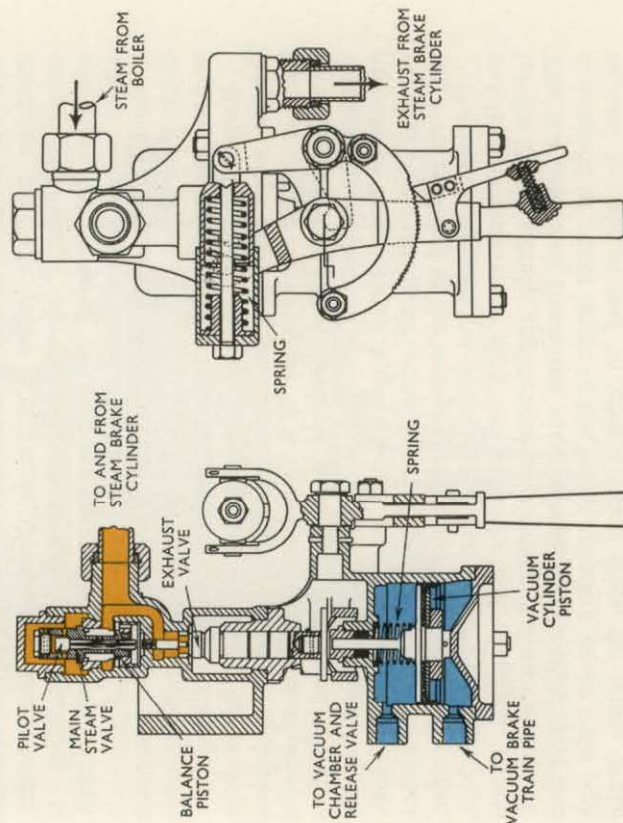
VACUUM-OPERATED GRADUABLE STEAM BRAKE VALVE (Mark IV)
